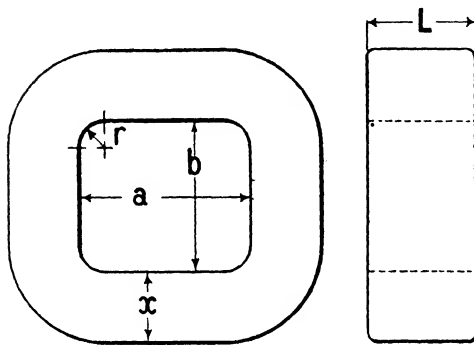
PRINCIPAL DIMENSIONS OF RECTANGULAR COIL.
